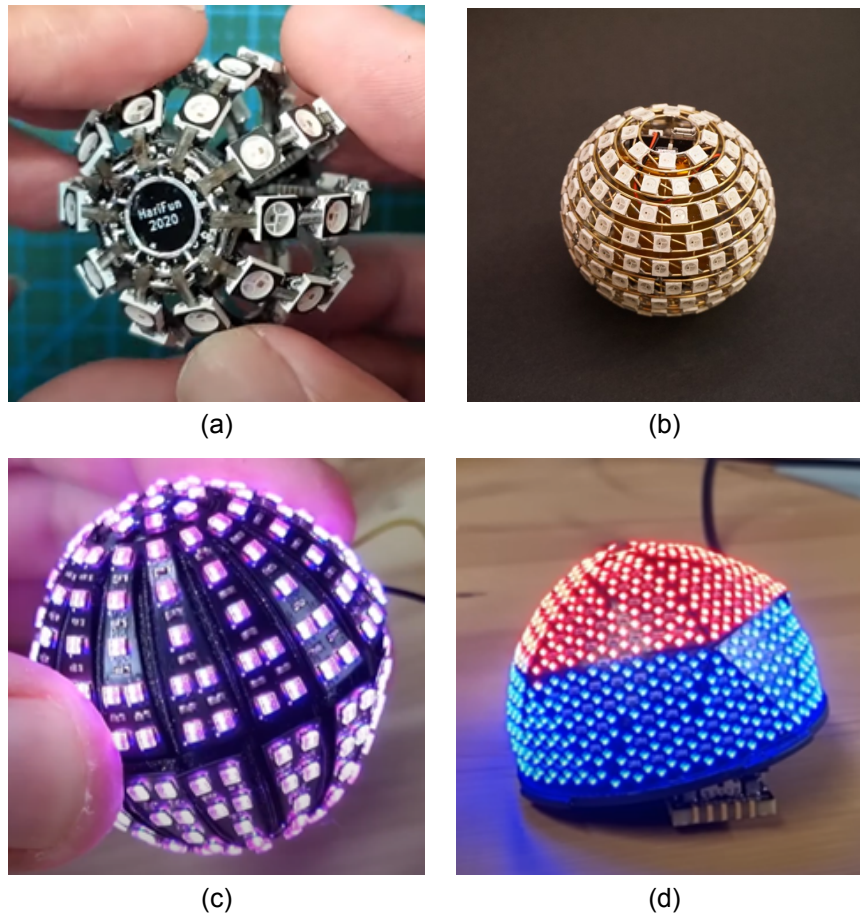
(a) Design by Hari Wiguna with leds orthogonal to the PCB [16], (b) Design by Jiri Praus that relies on very precise soldering [15], (c) Design by Carl Bugeja that uses a flexible PCB [13], (d) Design by Carl Bugeja that uses a flexible PCB divided into triangles [14]
